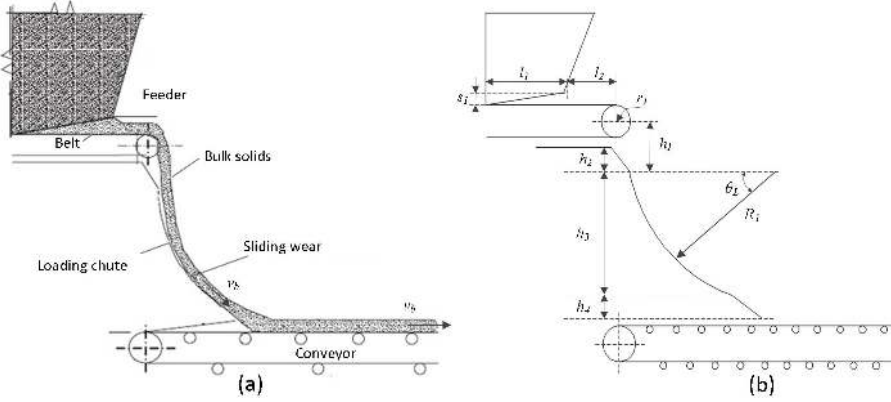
A transfer process in a belt conveying system (a) Feeding and transfer to a conveyor belt (b) Positions and dimensions
